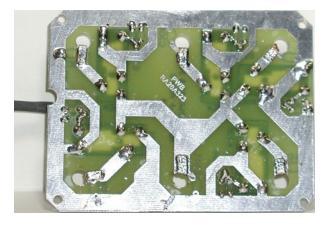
Foil side of PWB RA20A323. Note the solder braid attachment to the foil. Also note the solder flux has been removed and the board coated with clear lacquer.
